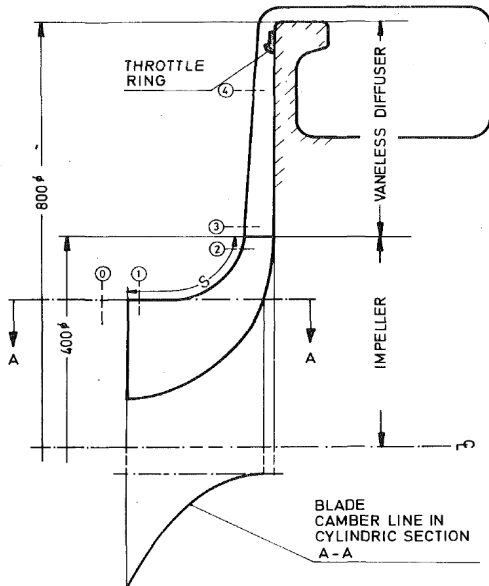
Cross-sectional view of the impeller⁽⁸⁾
